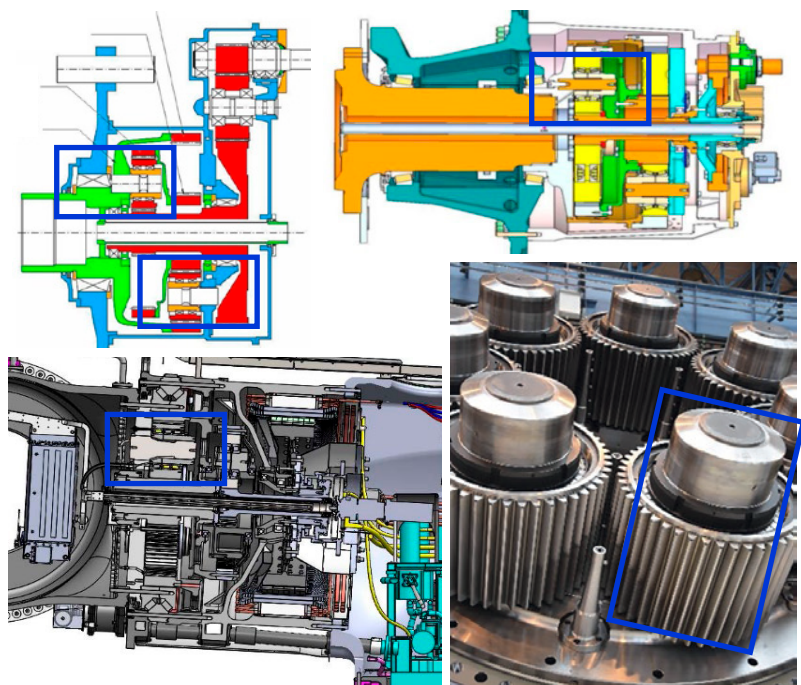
Top left: Gearbox design by MAAG (Ref. 17), believed to be the first wind turbine MGB featuring Flexpins. Top right: Design of a wind turbine MGB using Flexpins, having a compound planetary arrangement (sun gear of second stage connects to the ring gear of first stage (Ref. 19). Bottom left: SCD gearbox designed by the author (Ref. 9). Bottom right: Planetary stage with seven planets, 7 MW wind turbine MGB by WIKOV (Ref. 18). Flexpin highlighted in cross-sectional images.
